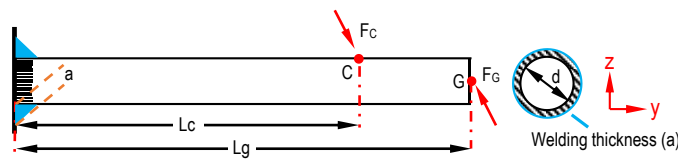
Defining the welding thickness of the lower wishbone arm
